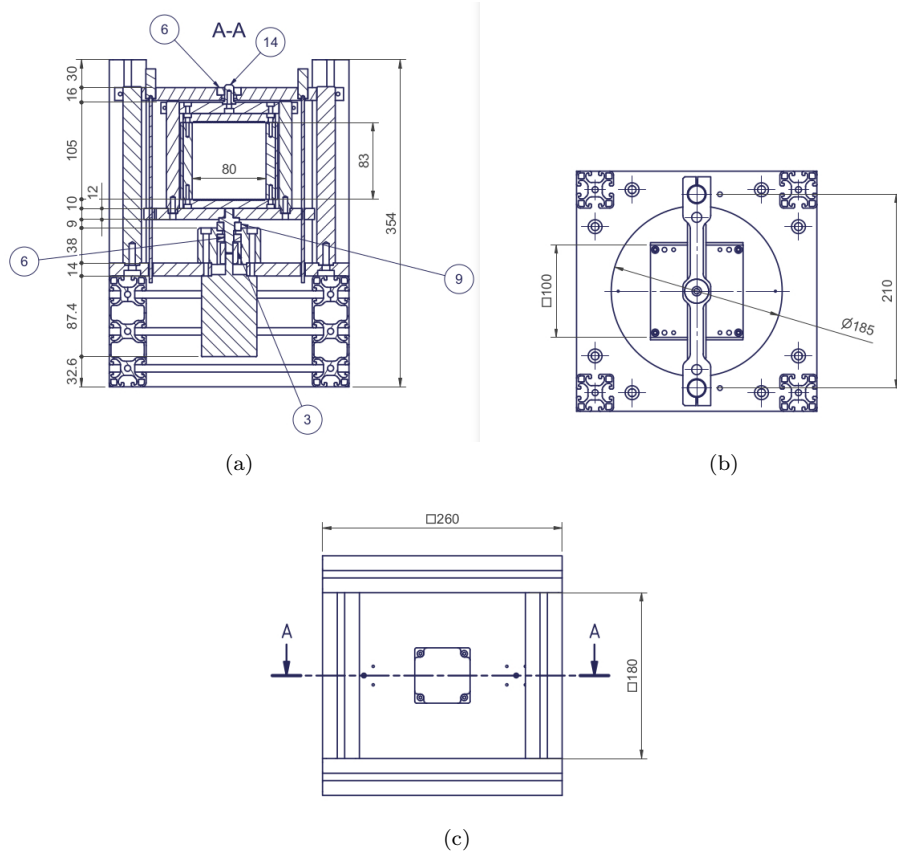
Design of the chopper with the wafers box installed on the rotating plate. In (a), a frontal section of the chopper is shown with the collimator box and the motor. In (b) the top view and in (c) the bottom view are presented. The two holes for the photodiodes can be seen in (c).
